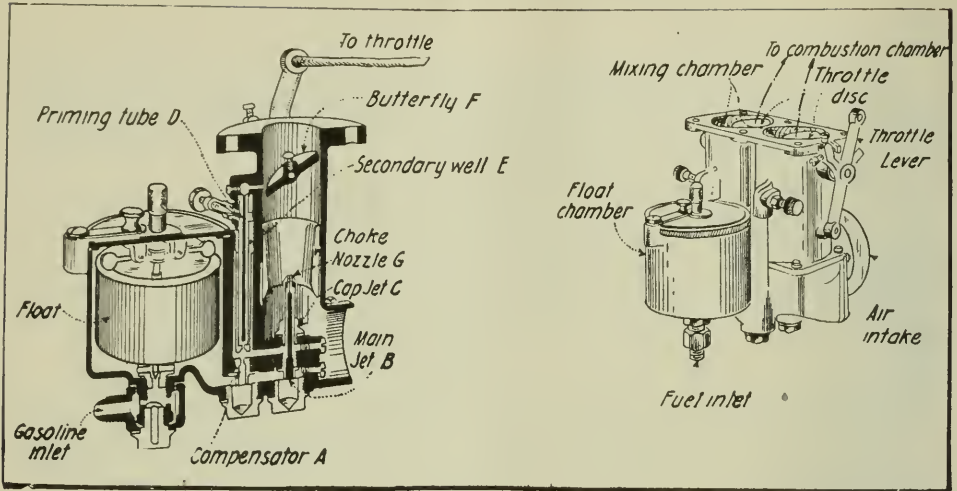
(left)—Sectional view of carburetor showing details of the compound nozzle and compensator
